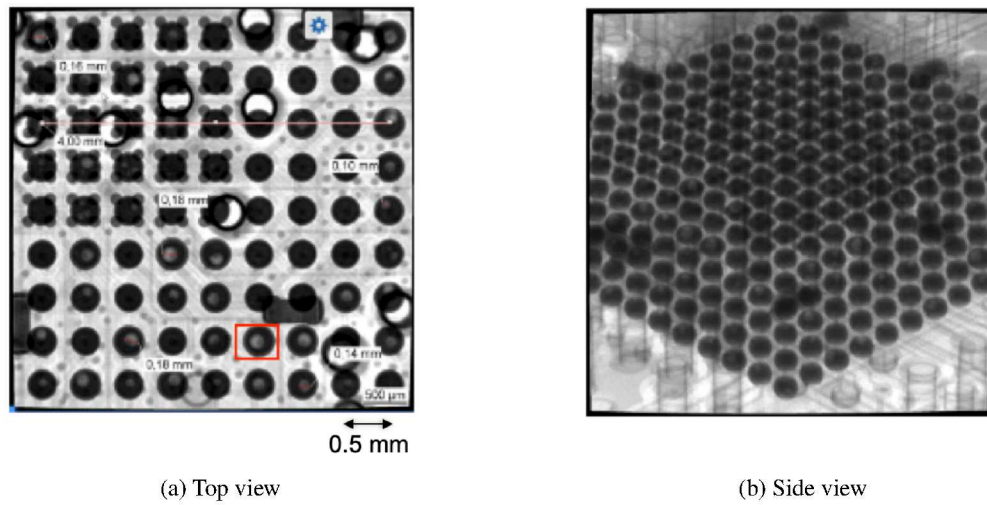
3D X-ray image of the solder joints of the lpGBT BGA from the top view (a) and from a different angle (b). A solder joint with a large identified air bubble is highlighted in red. Taken from [163].
